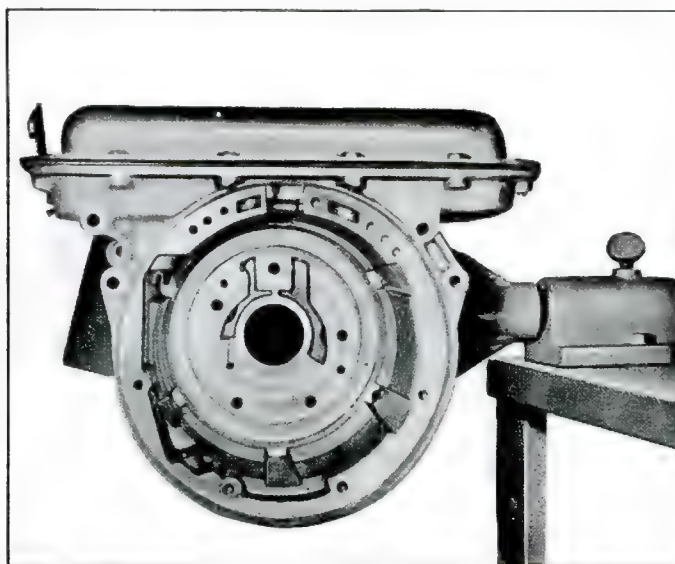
E-49—Transmission Case Installed in Holding Fixture J-7896
